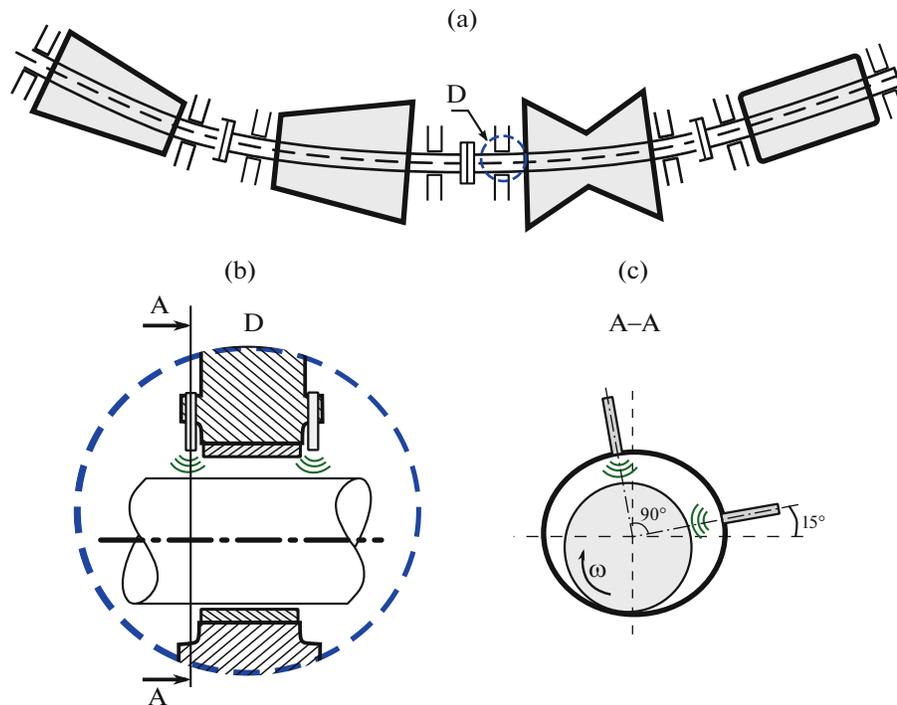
Schematics of (a) the shafting, (b) an elliptical bearing, and (c) the shaft- position sensors.
